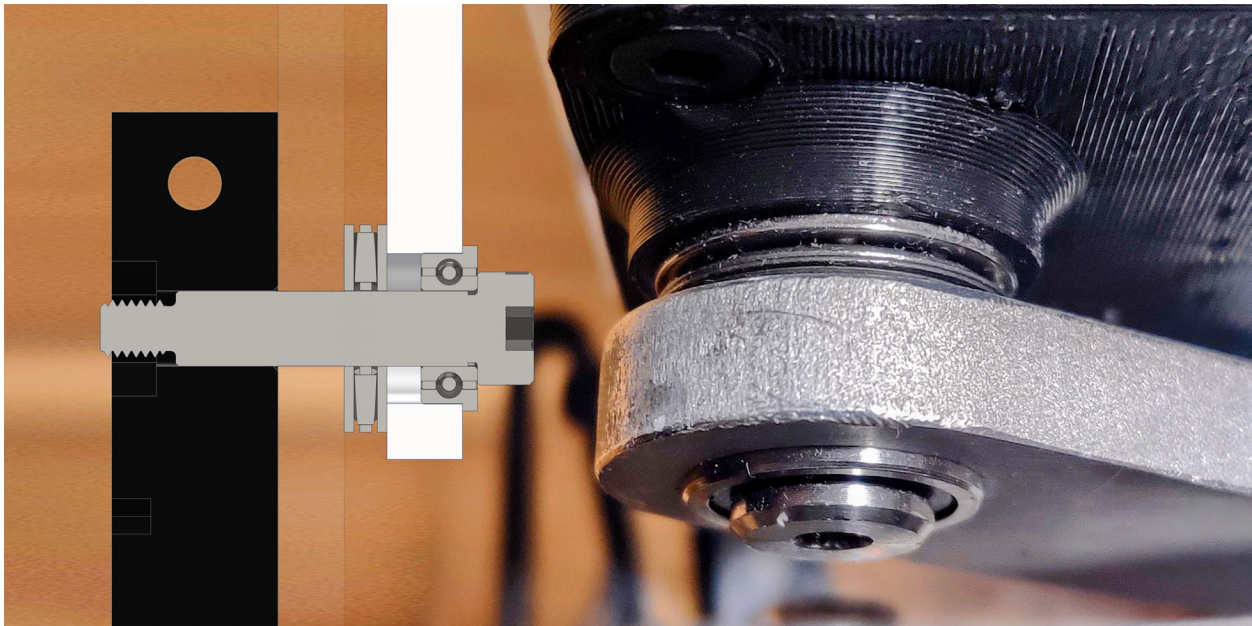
Scissor Lift Pin Joint: Cross Section View
